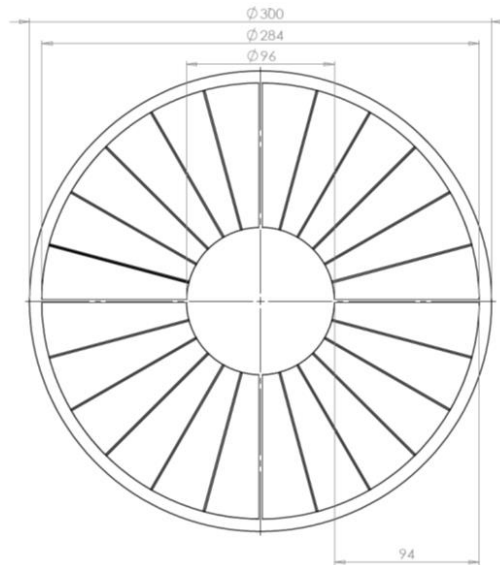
Standard dimensions for radial blade rotary wheel
